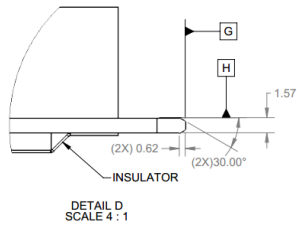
Small Form Factor Keep Out Zone – Side View – Detail D
